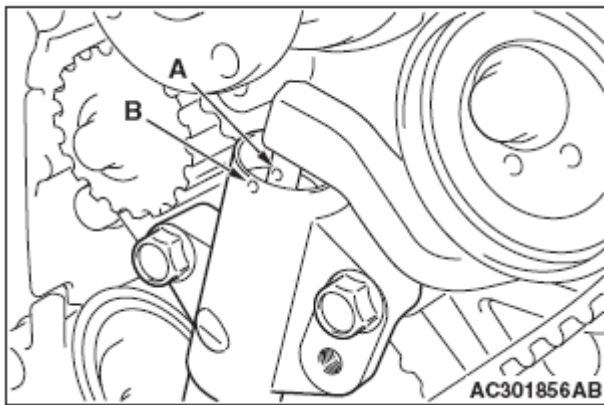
Identifying Timing Belt Tensioner Adjuster Rod Set Hole A And Cylinder Set Hole B
